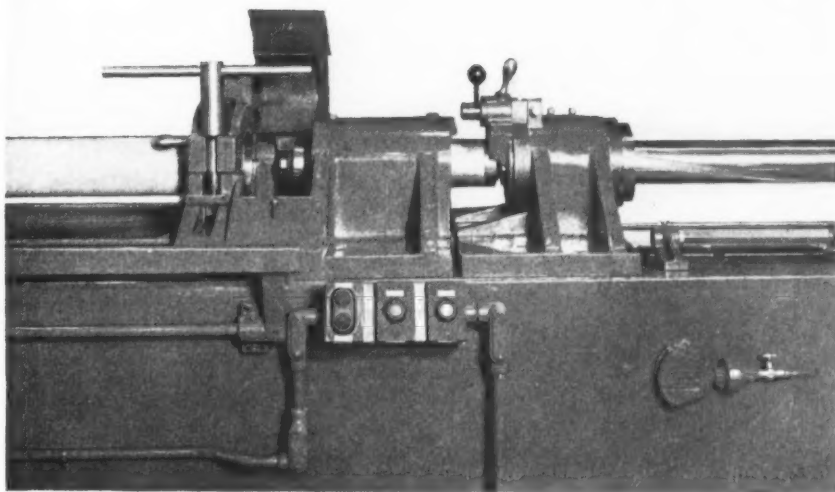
American Hydraulic Gun-broaching Machine with Hinged Guard Raised to Show Cutter on Quill Ready to Enter Bore
